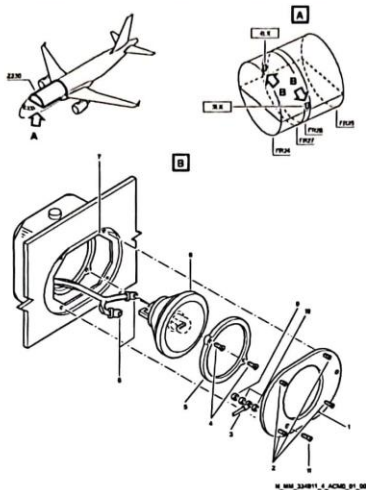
A (SHEET 1) - Lamp of the Wing and Engine Scan Light (Honeywell)
